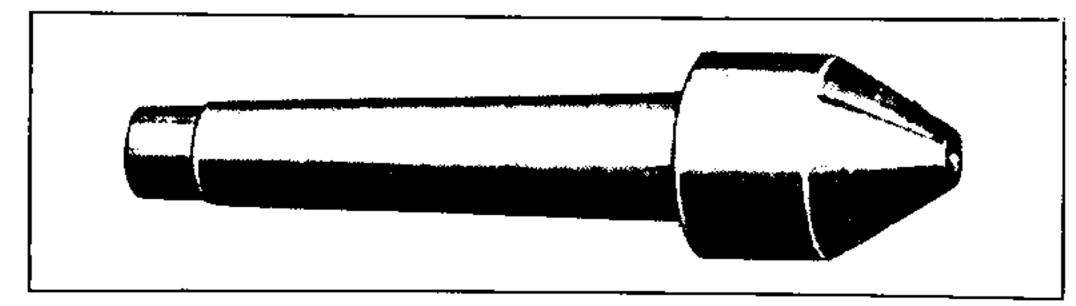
Female Center — head is hard, $\frac{27}{32}$ diameter and is ground to 60° external angle. The hole, $\frac{3}{16}$ maximum diameter, is 60° included angle
